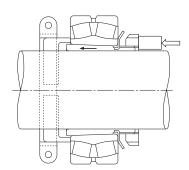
Removal of Adapter with Stop and Axial Pressure
